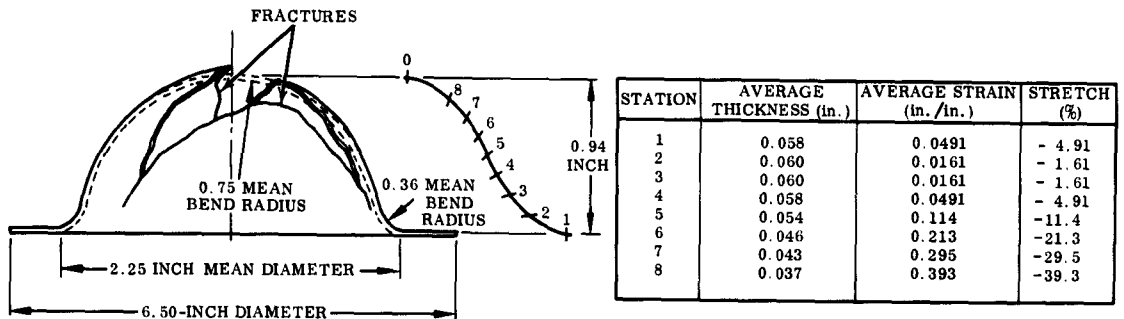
ANALYSIS OF DROP HAMMER FORMED DEEP DRAWN TUNGSTEN; Specimen No. 2
